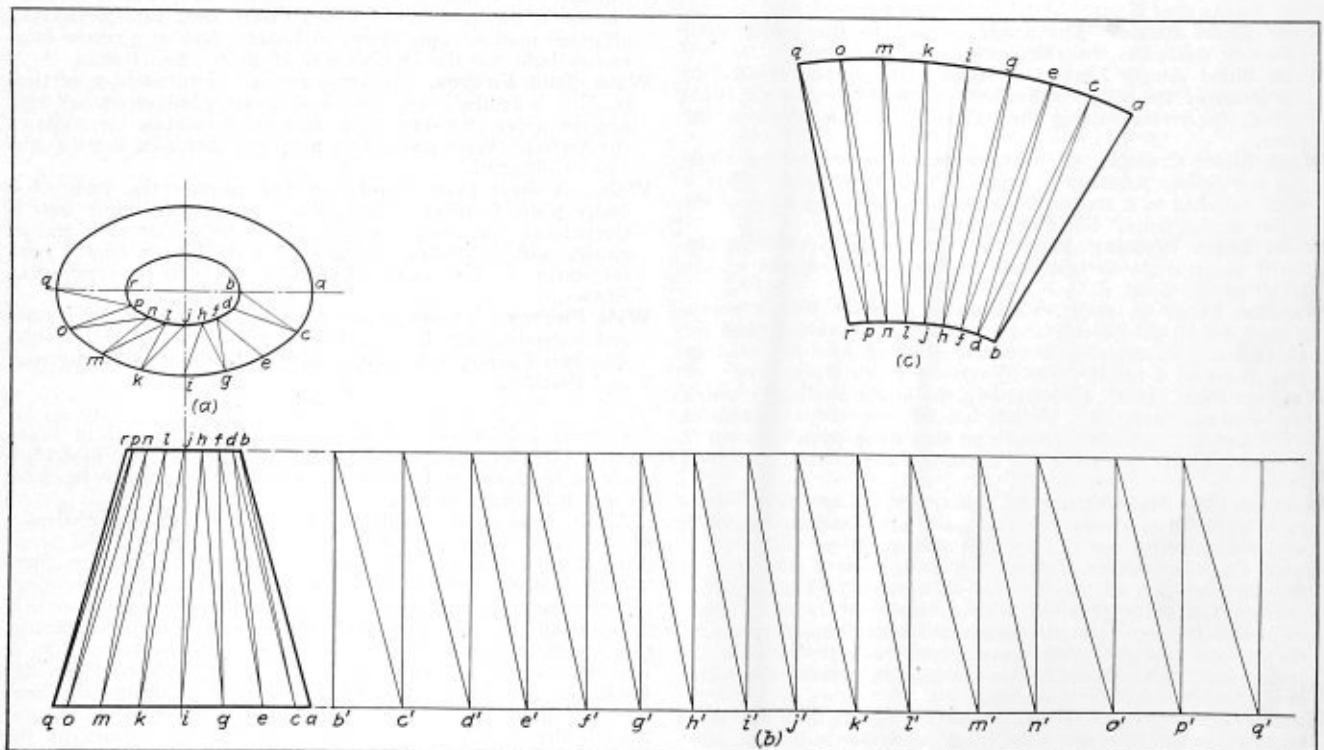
Plan, elevation and true length layout of elliptical cone
